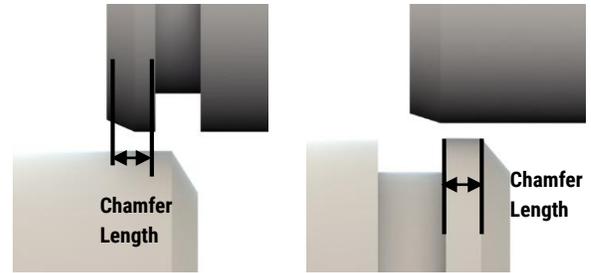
Example of Chamfer Length and Extrusion Gap
